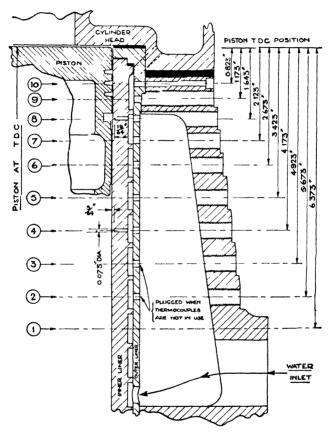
2—Positions for traversing thermocouples on non-thrust side of E19 engine, bore 4 5 in. × stroke 5 5 in.
